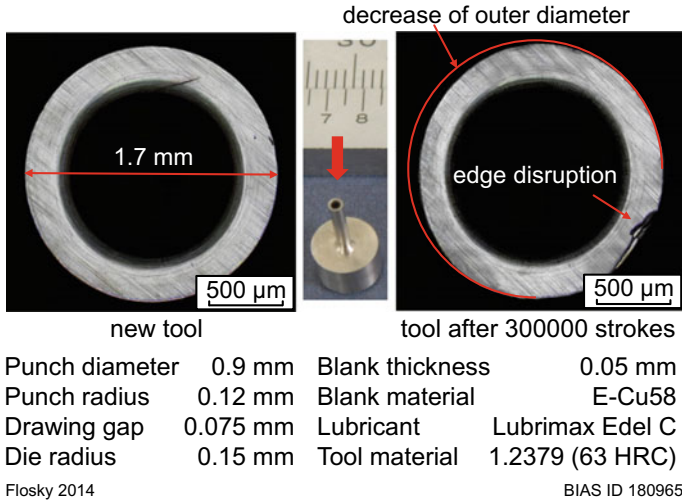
New tool (left) and tool after 300,000 produced cups (right)
